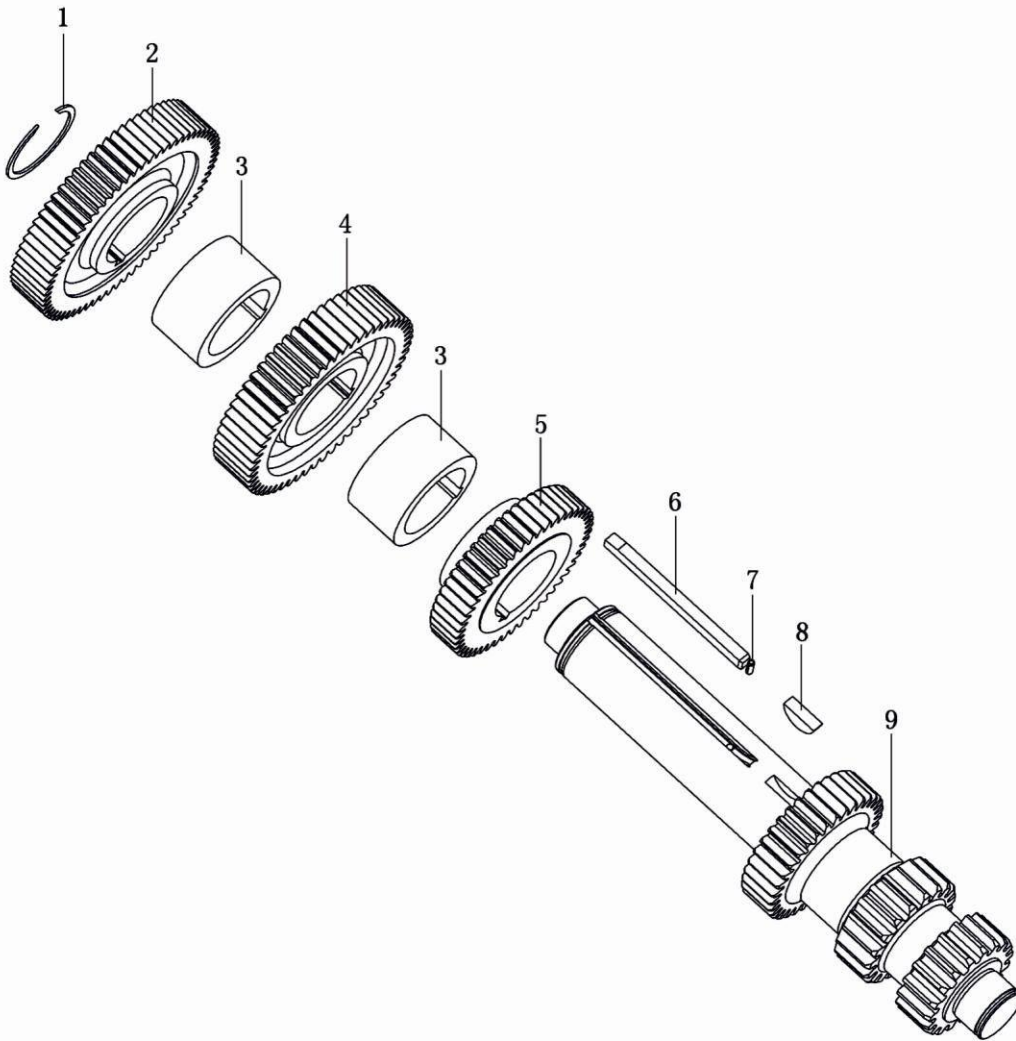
JS 8-1 series gearbox one shaft parts breakdown
